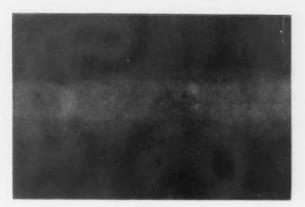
A satisfactory weld in a one-inch plate revealed by the gamma ray.
